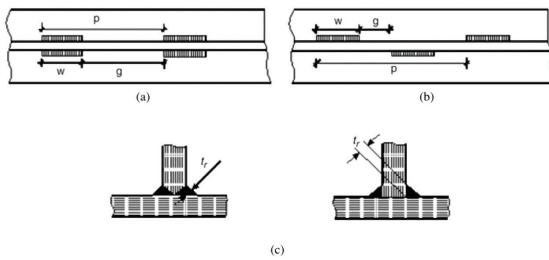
Typical intermittent fillet welds: (a) chain intermittent fillet welding; (b) staggered intermittent fillet welding; and (c) the throat thickness of fillet welds [70]. Reproduced under license from Elsevier.
